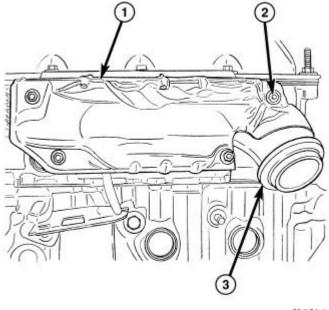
Exhaust Manifold Right Courtesy of CHRYSLER LLC
